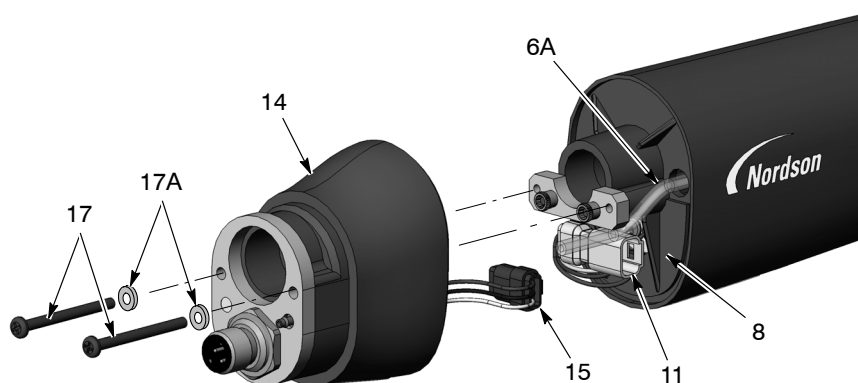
Tube-Mount Spray Gun Disassembly 3 of 5
